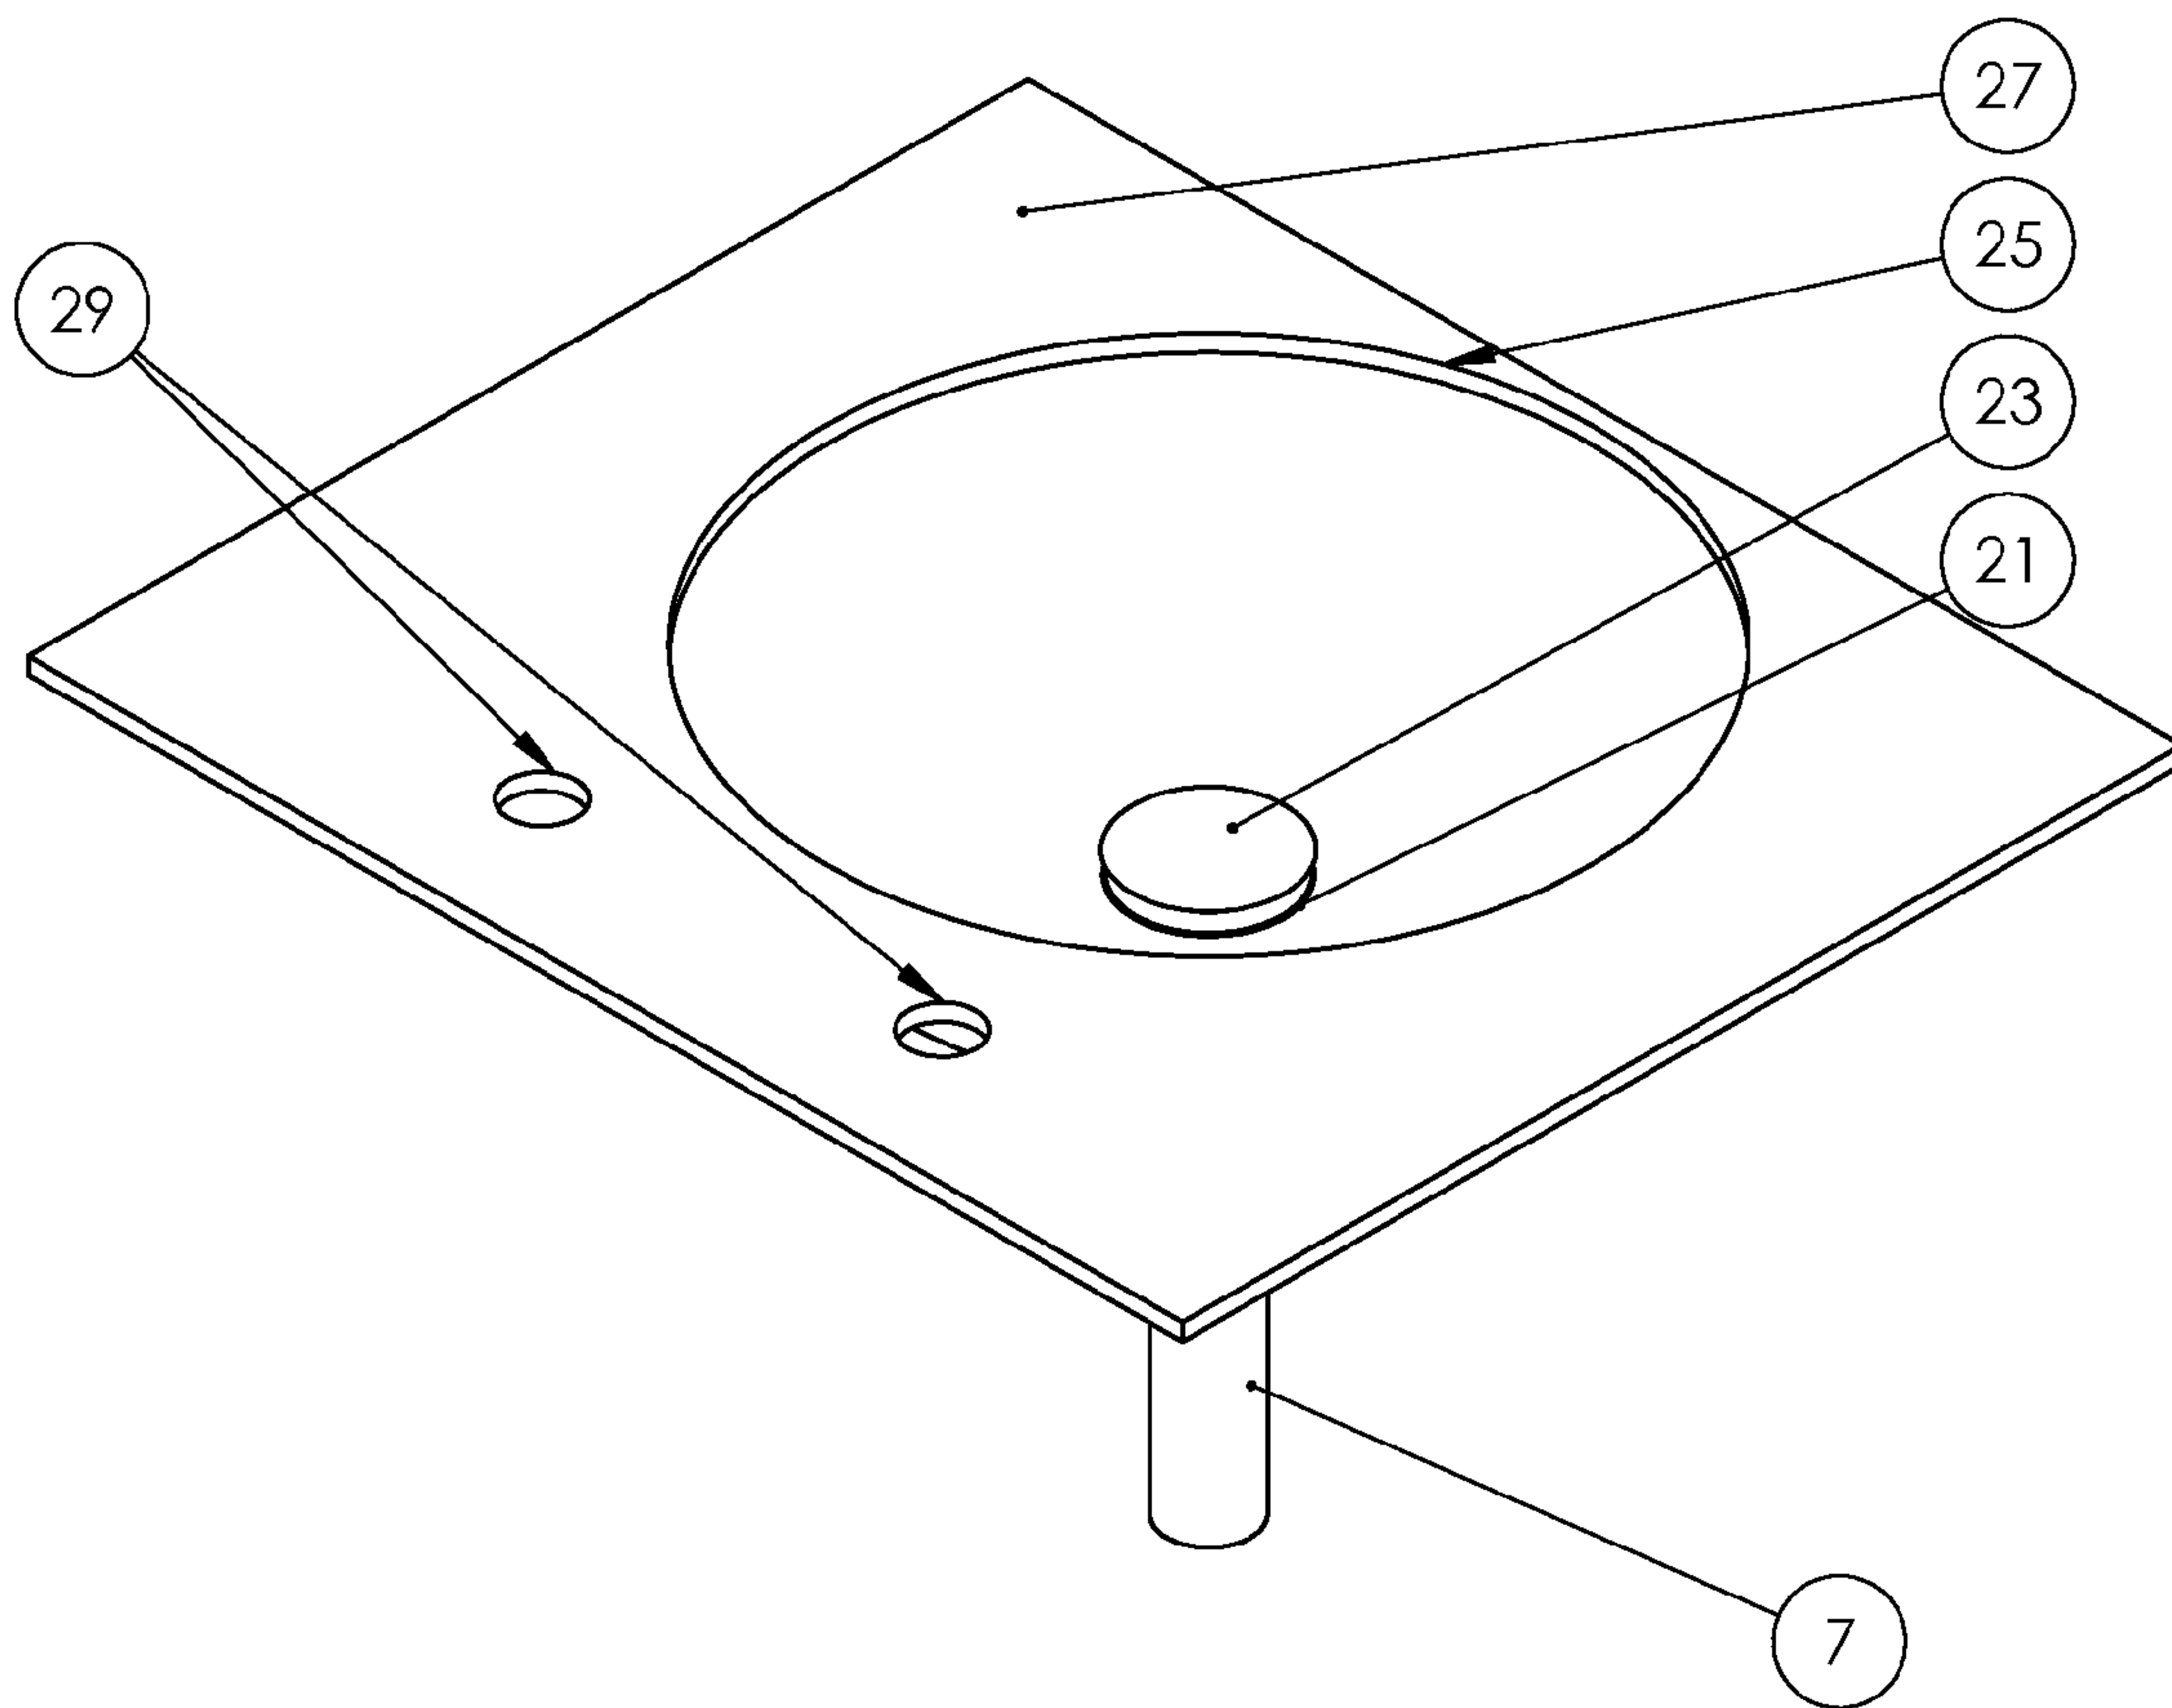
Isometric view of a lavatory sink equipped with a lavatory drain fitting ending in a vertical tubular tailpiece.
